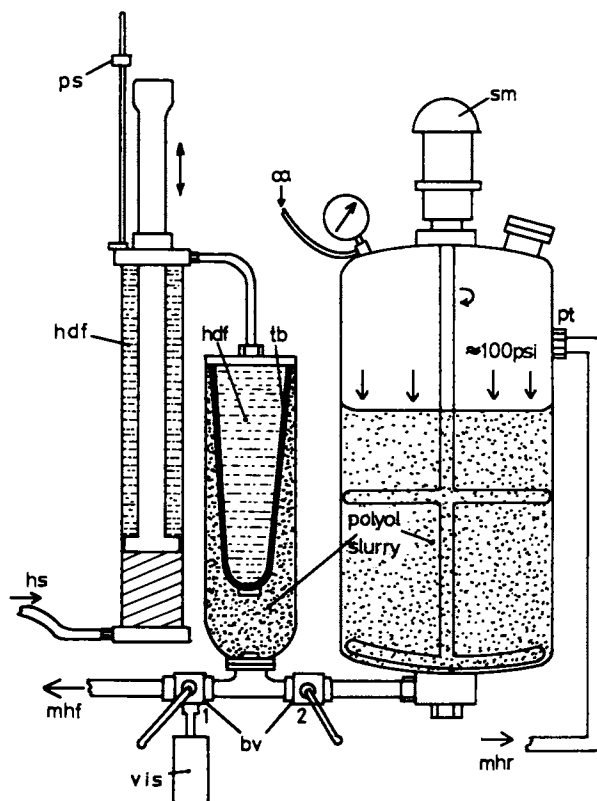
Schematic diagram of the RRIM dosing unit used for processing polyol slurries. Key: pt, polyol holding tank; ca, compressed air; sm, stirrer motor; hdf, hydraulic displacement fluid; tb, transfer barrier (nitrile rubber); ps, proximity switch; mhf/mhr, mixing head feed/return lines; hs, hydraulic supply from metering pump 1; bv, ball valves (1 and 2); vis, viscometer.
